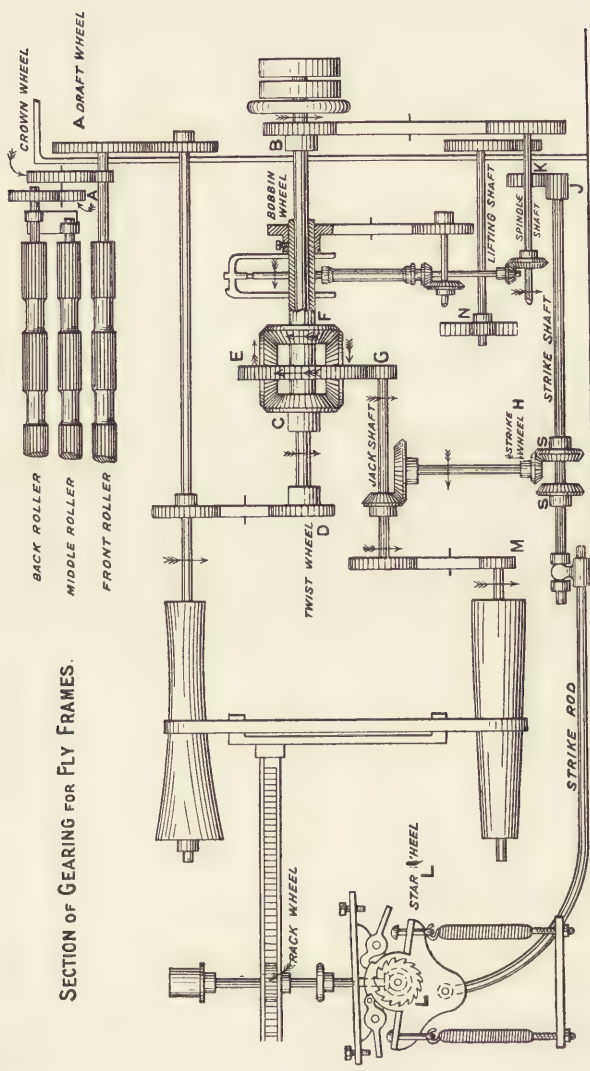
SECTIONAL ELEVATION OF FLY FRAME AND PLAN OF ROLLERS.
